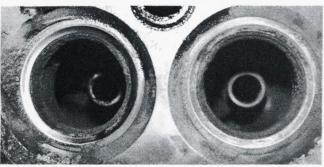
Cylinder head, exhaust valves and seats at 6290 running hours on HFO without overhaul.
